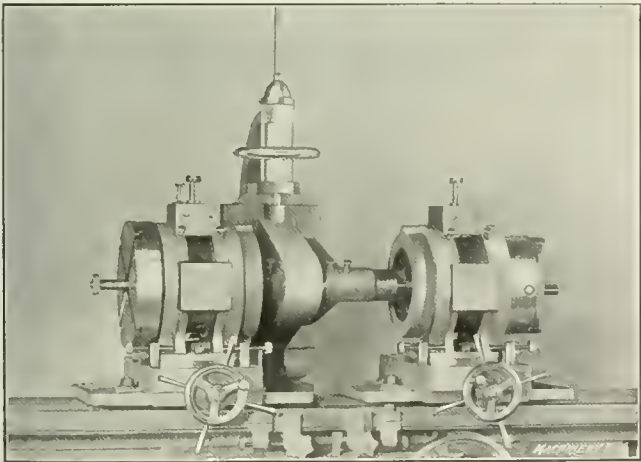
Headstocks on No. 21½ Grinder, with Faceplate and Universal Chuck
